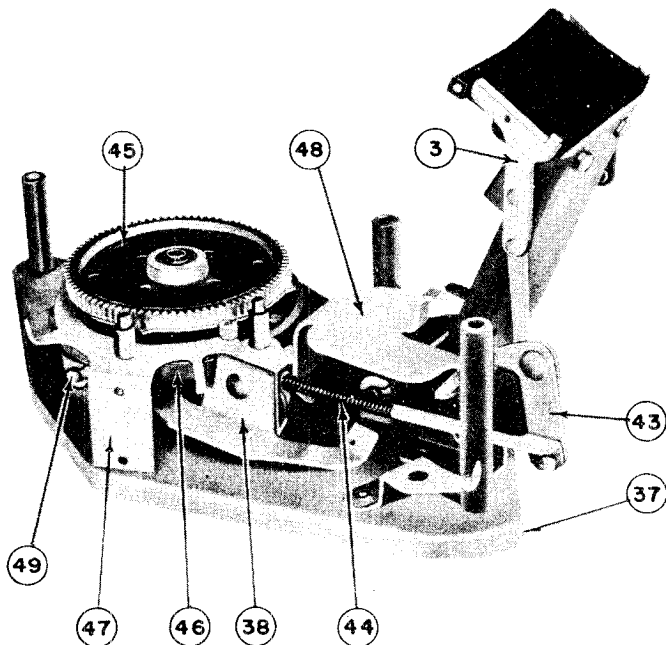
PARTS LOCATION -- SUB PLATE ASSEMBLY
